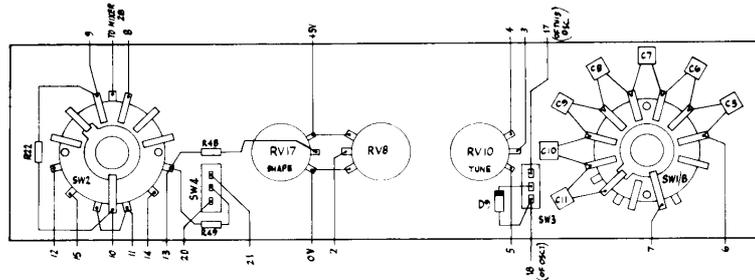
Front Panel Wiring for Oscillators 2, 3 & 4
